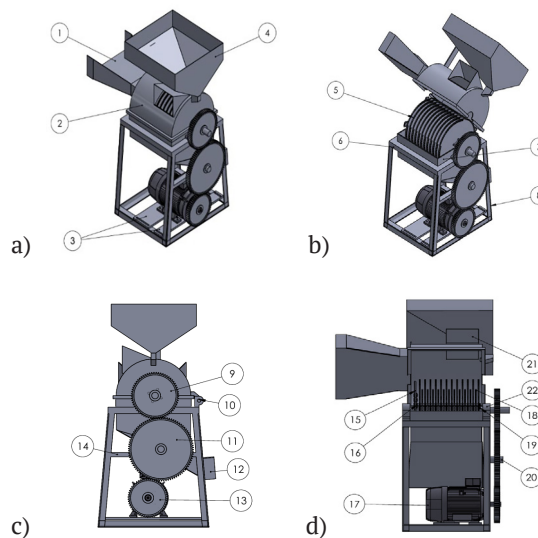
(a, b) schematic diagram, (c) right side view, and (d) front side view of the model
